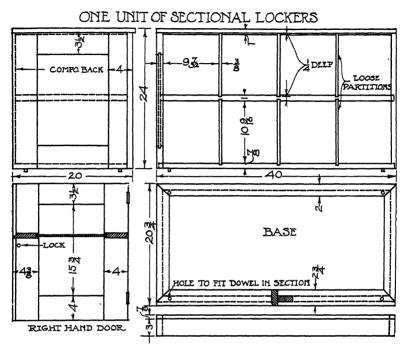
DETAIL OF LOCKER ARRANGEMENT
